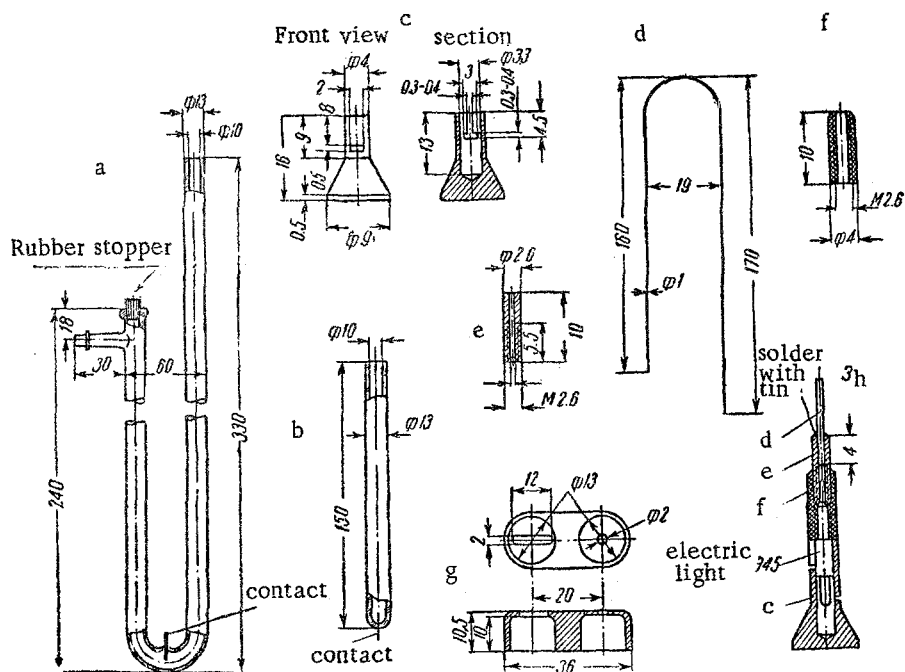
Outlines of the main details of the manometer. a) V-shaped glass tube with soldered-in contact; b) straight glass tube with soldered-in contact; c) stainless steel float; d) steel wire contact; e) brass connector; f) ebonite bush; g) brass adjusting cap; h) outline of assembled details c, d, e, f, and E-45 electric lamp (where it is impossible to solder the contacts in parts a and b, they may be introduced into the mercury through a vertical orifice in the left tube of part a, closed with a rubber stopper, and from the cap g in part b).
